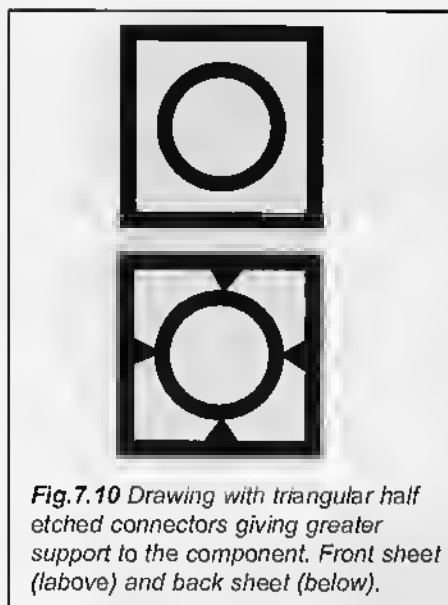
Drawing with triangular half etched connectors giving greater support to the component. Front sheet (above) and back sheet (below).
